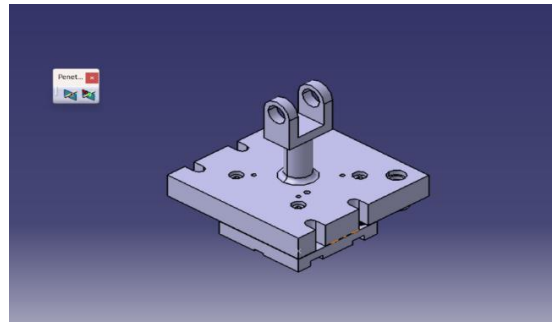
(D) TOP ASSEMBLY WITH FOLLOWER
